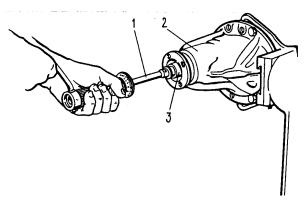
Checking Preload of Drive Pinion Bearings:
